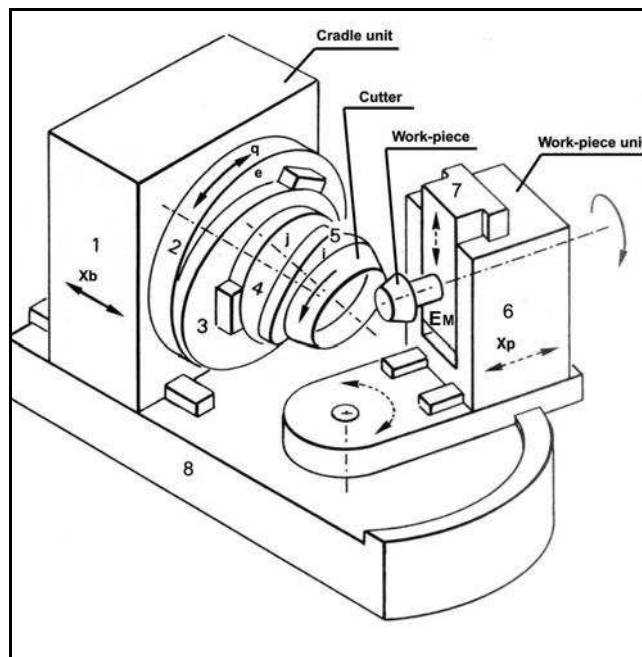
Conventional machine [4]: 1- cradle units, 2 – cradle, 3 – eccentricity, 4 swivel angle, 5 - cutter spindle rotation angle, 6 – work-piece unit, 7 – blank offset, 8 – frame
